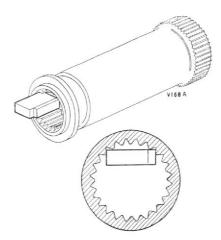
Using slip gauges to check the internal serrations of the accessory drive shaft.
